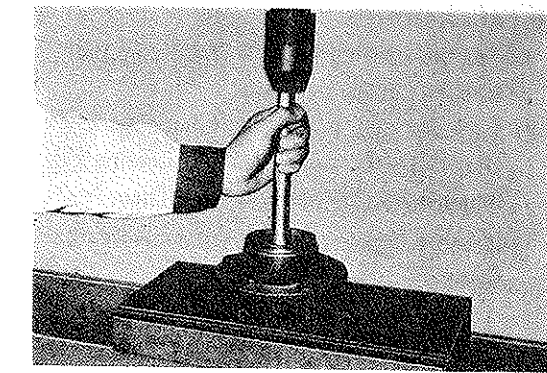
Press-Fitting of Tapered Roller Bearing
